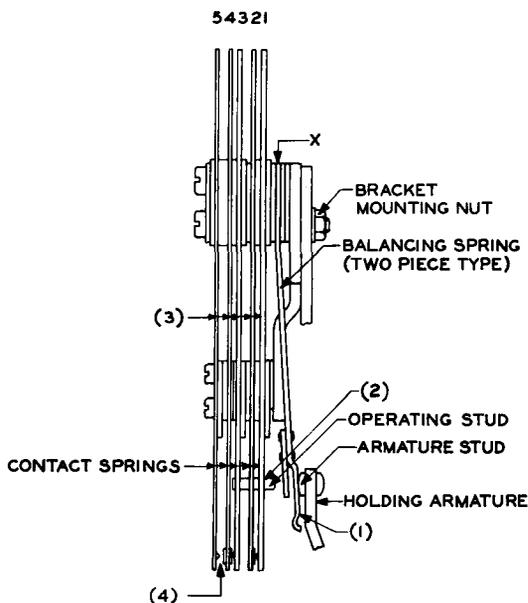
Fig. R — Bracket-Type Holding Off-Normal Spring Assembly
